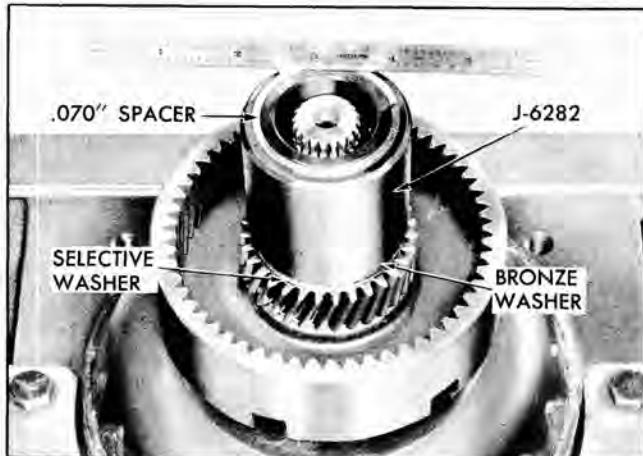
Selecting Front Unit Spacer Using Special Tool
